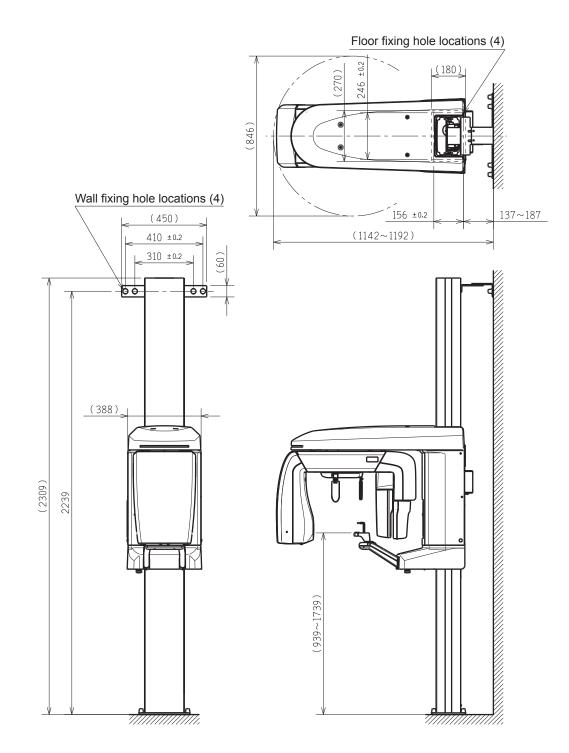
Fixing hole location measurements (Standing position wall-mount long type: 3D type)
